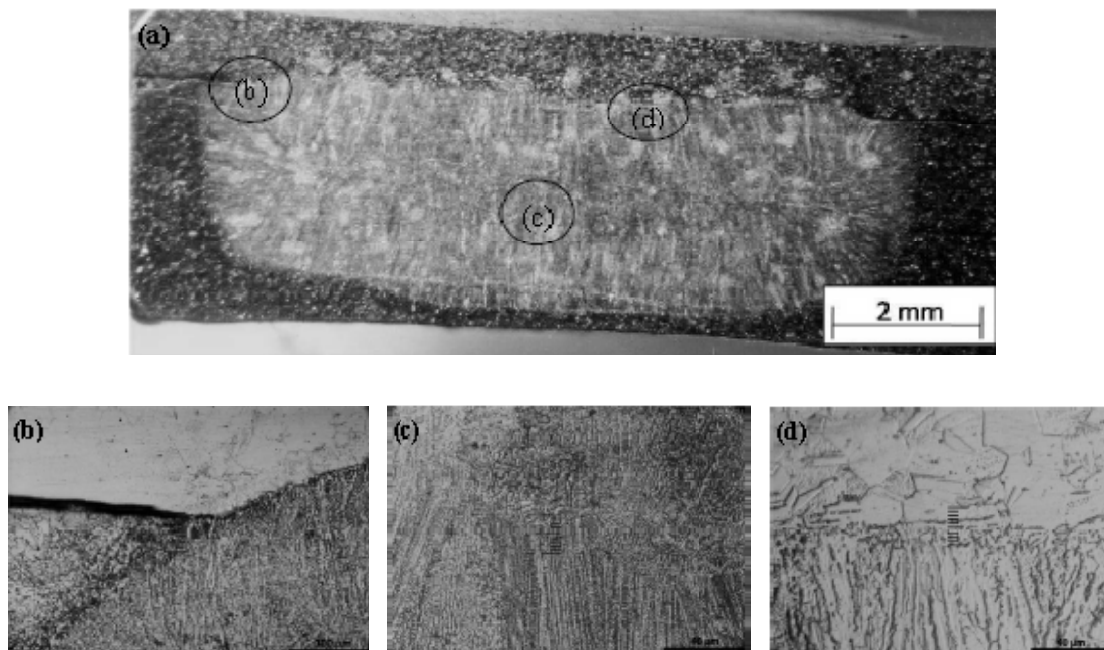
Weld profile of 3.0-1.0 mm thick joints (a) macrograph (b) nugget corner (c) nugget (d) interface
